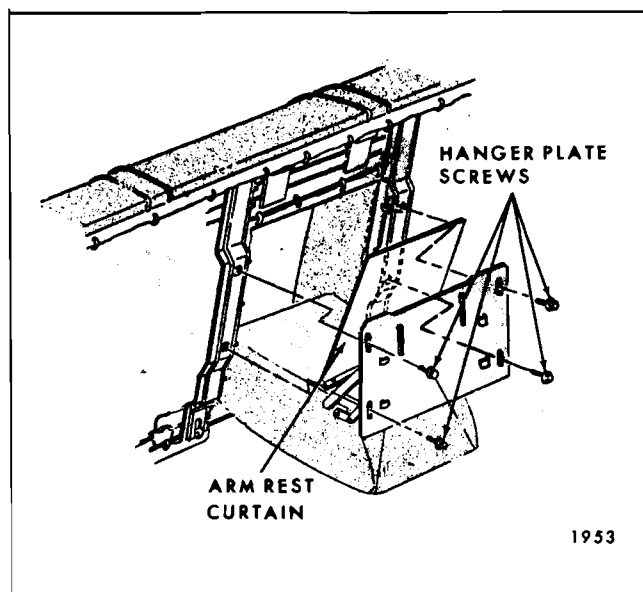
Rear Seat Back Arm Rest and Hanger Plate
